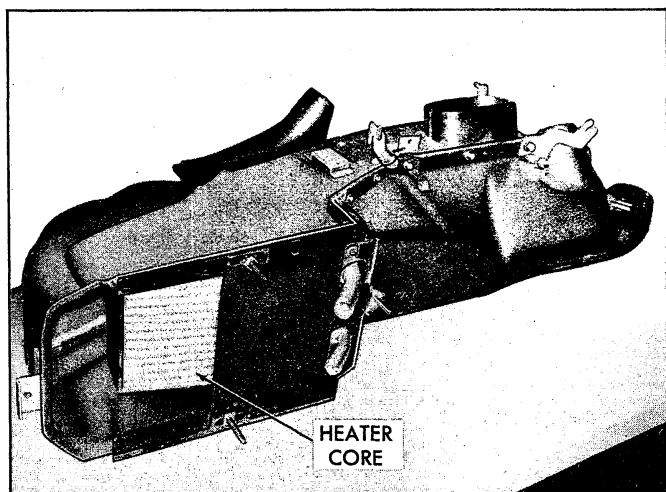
Heater Core Removal—Four-Season System (Corvette)
